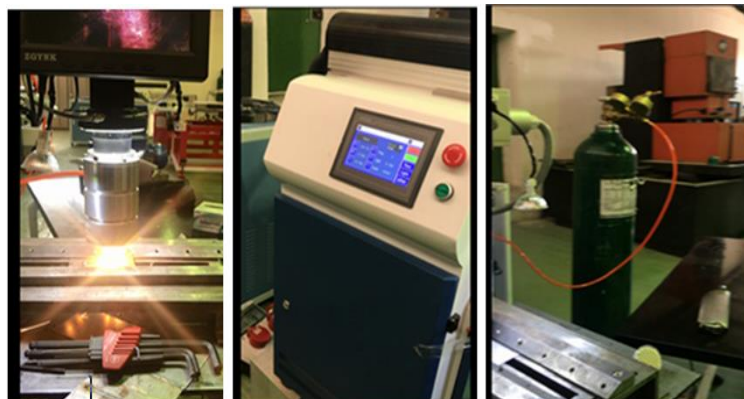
show the Pulse Nd: YAG laser welding system, (a) laser welding machine; (b) laser generating device and (c) argon gas tube.
